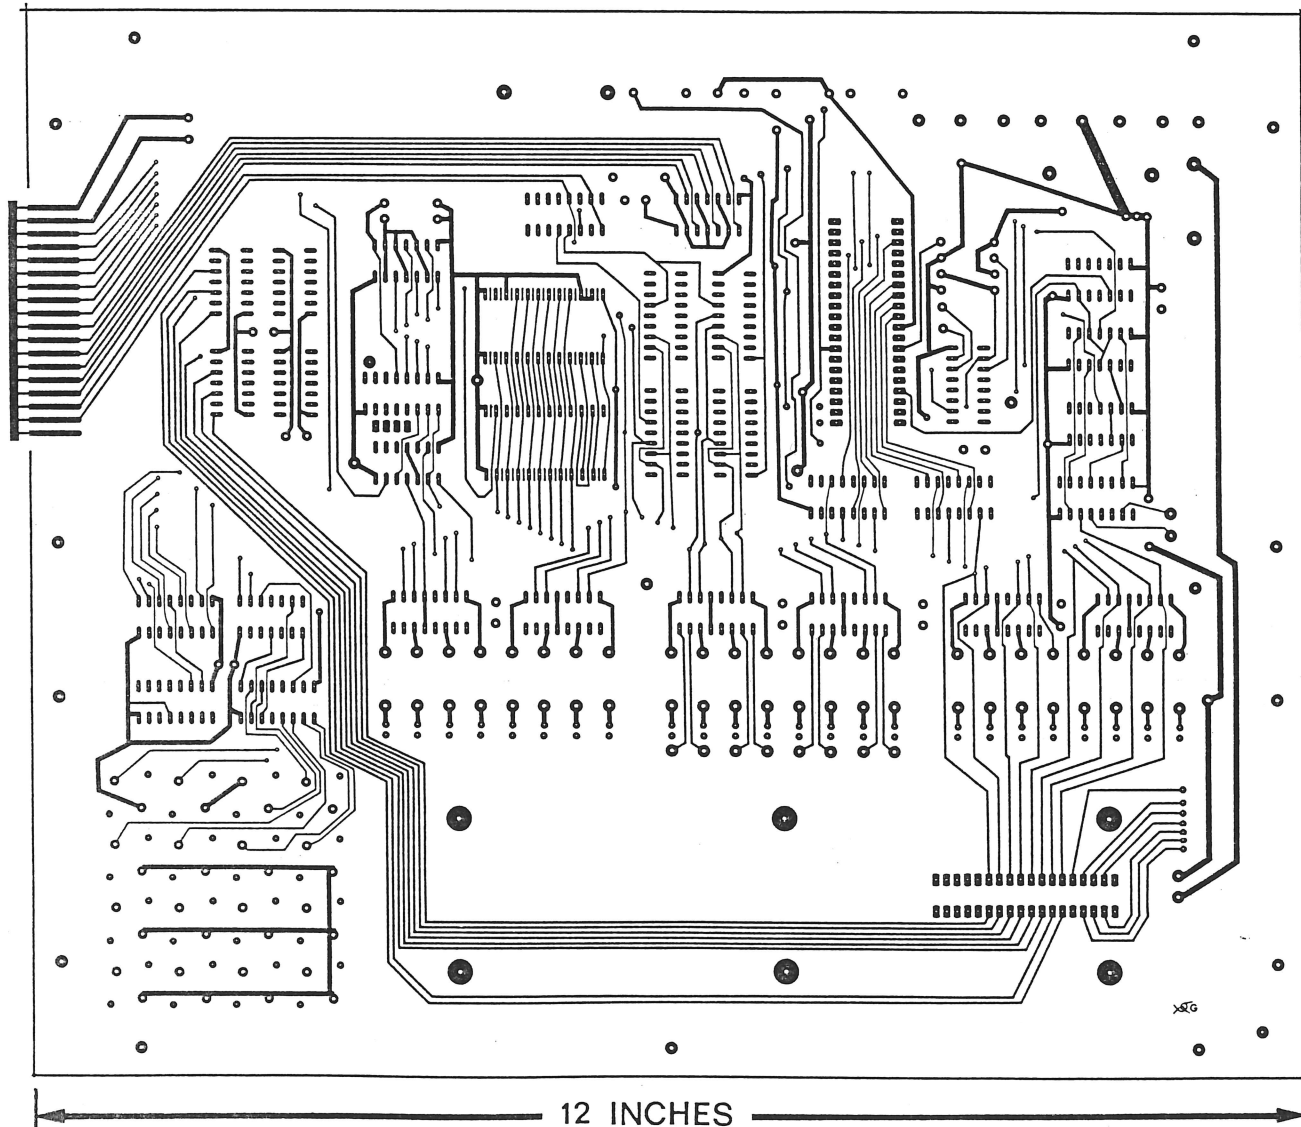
FOIL PATTERN of the bottom of the double-sided board. A board with plated-through holes is recommended.
